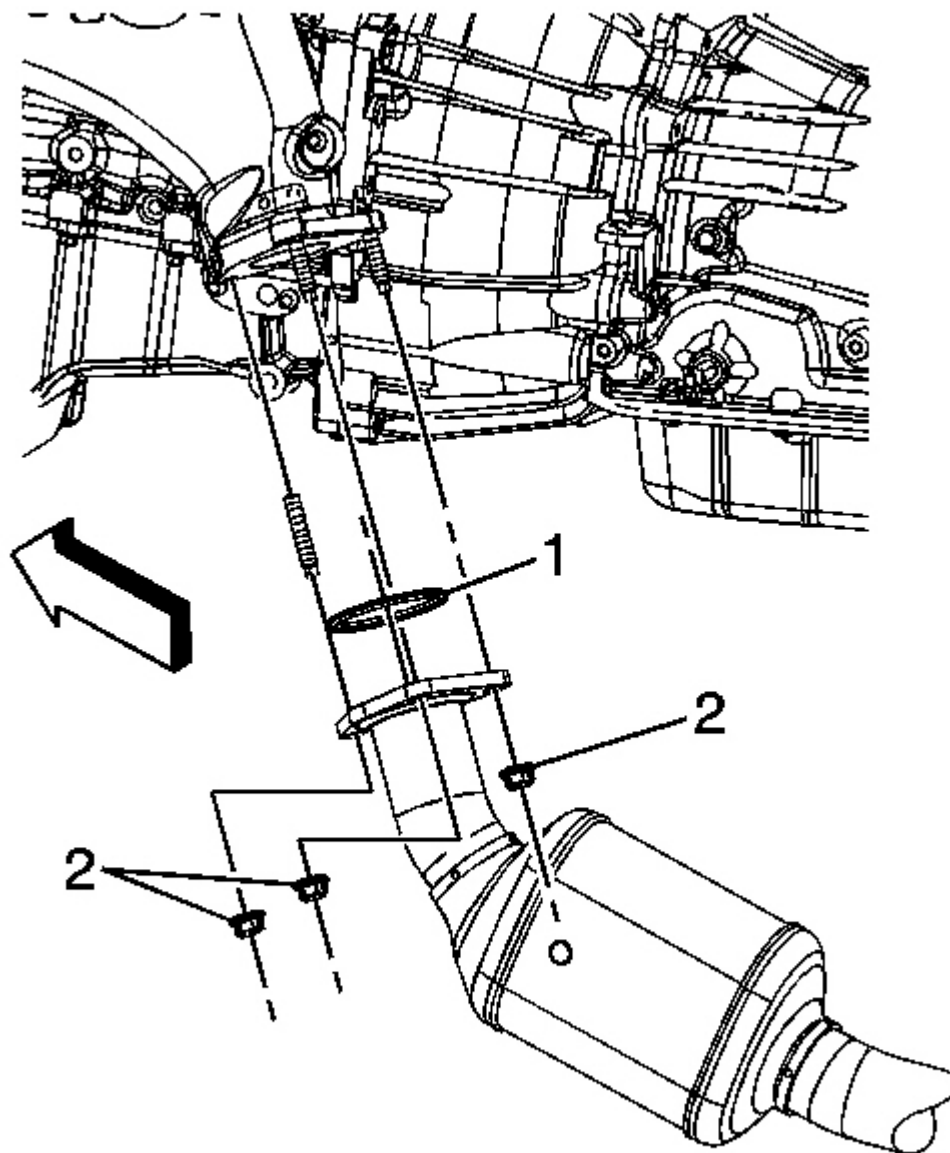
View Of Exhaust Manifold, Catalytic Converter, Gasket & Nuts
